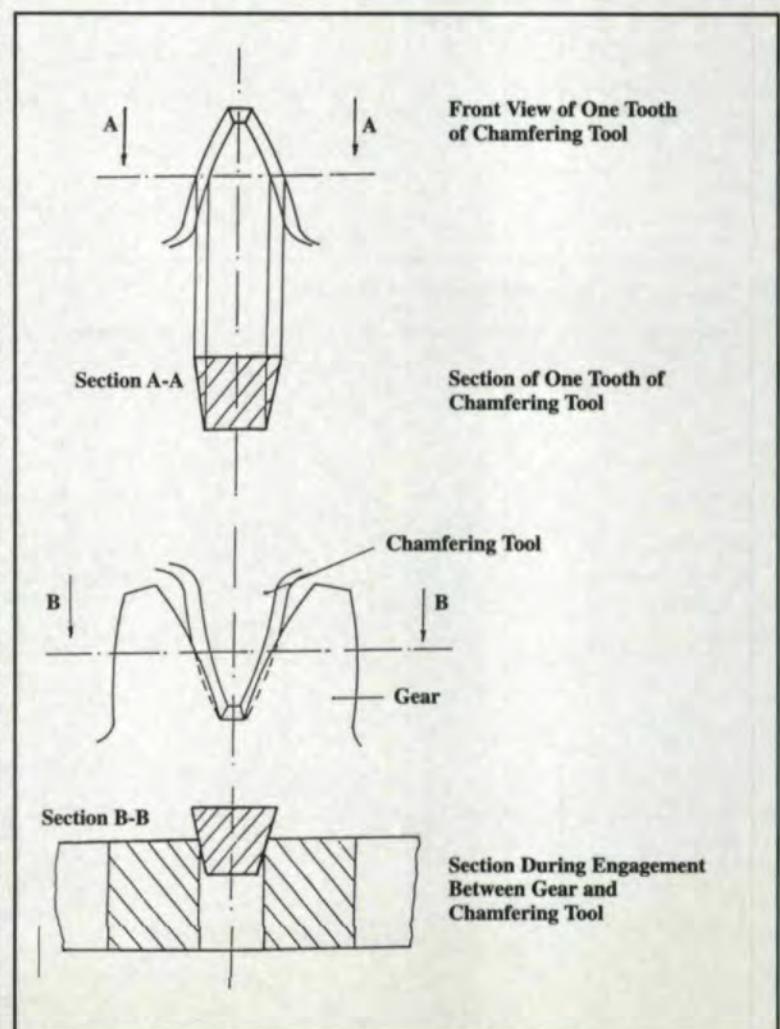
Gear tooth and chamfering tool tooth sections.
